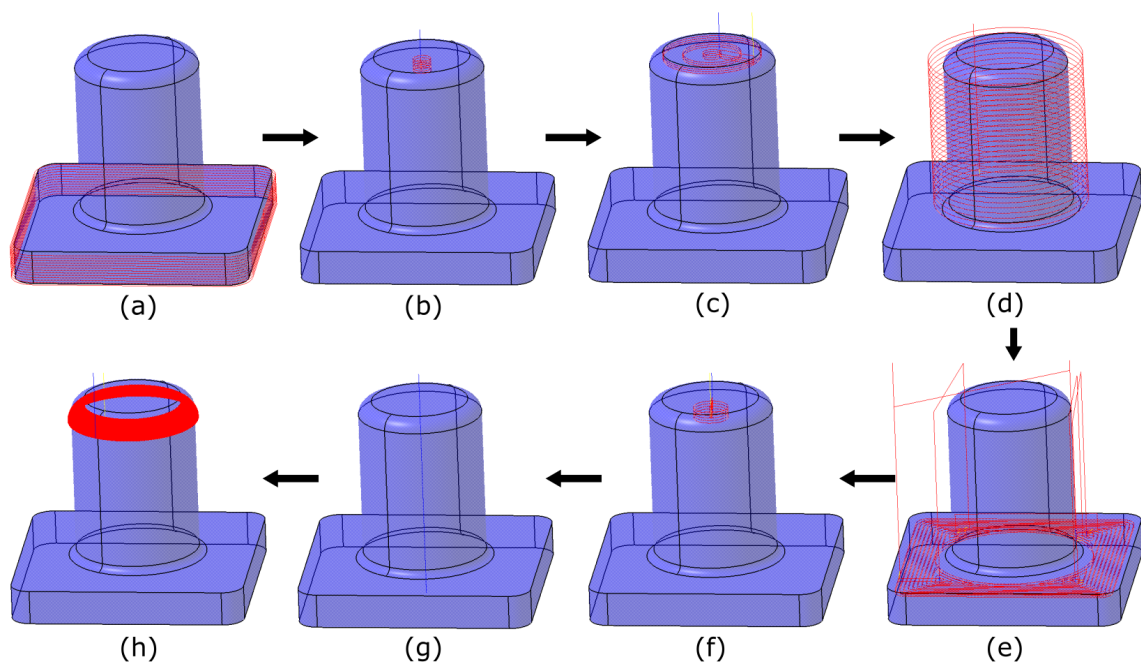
Machining process of the demolding test tool. (a) Profile contouring 1, (b) pocketing 1, (c) facing, (d) profile contouring 2, (e) spiral milling, (f) pocketing 2, (g) drilling, and (h) isoparametric machining operation.
